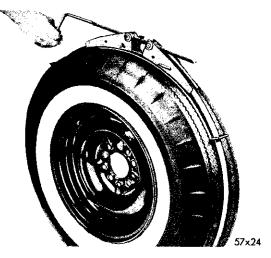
Constricting Centerline of Tire with Mechanical Tool
